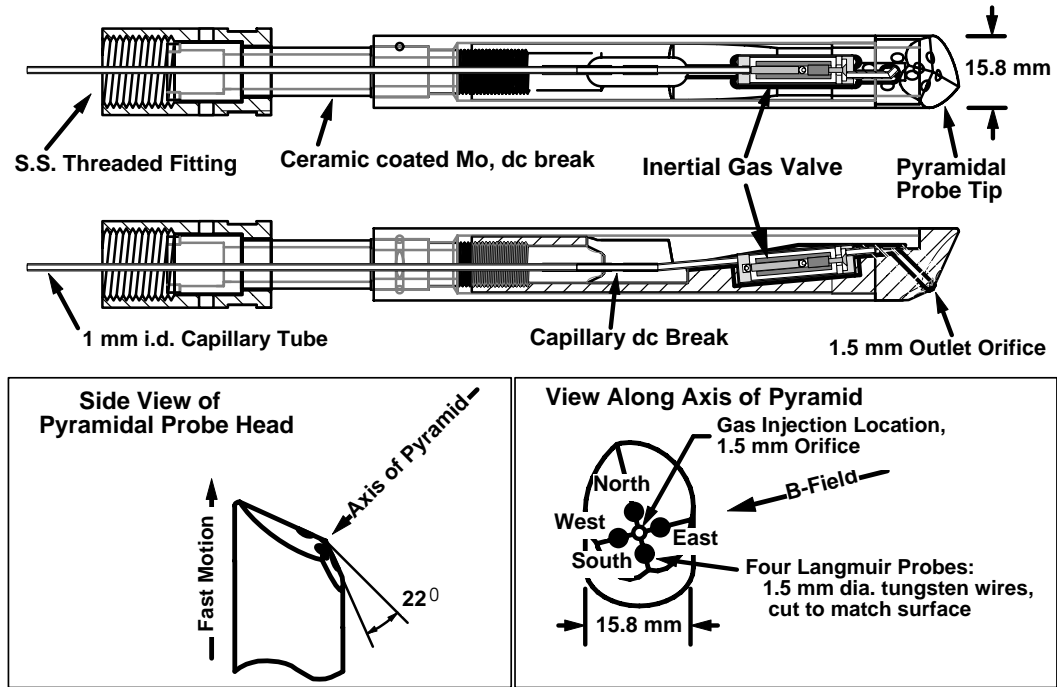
(Top) Transparent view of fast-scanning probe head assembly showing gas feed and inertial valve location. (Bottom) Close-up views of pyramidal probe tip (actual scale). The materials are: molybdenum ~ body of the probe head, stainless steel ~ capillary tubes and inertial valve, tungsten ~ Langmuir probes, alumina and alumina coating ~ electrical insulation.
